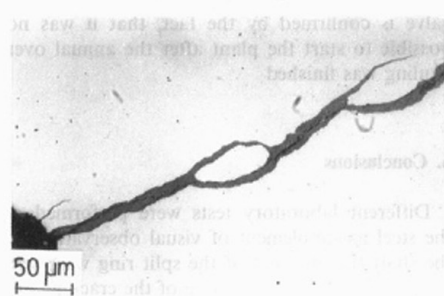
Cracks with oxidized surface in the marked angle of the split ring groove in Fig. 17. Polished specimen.
